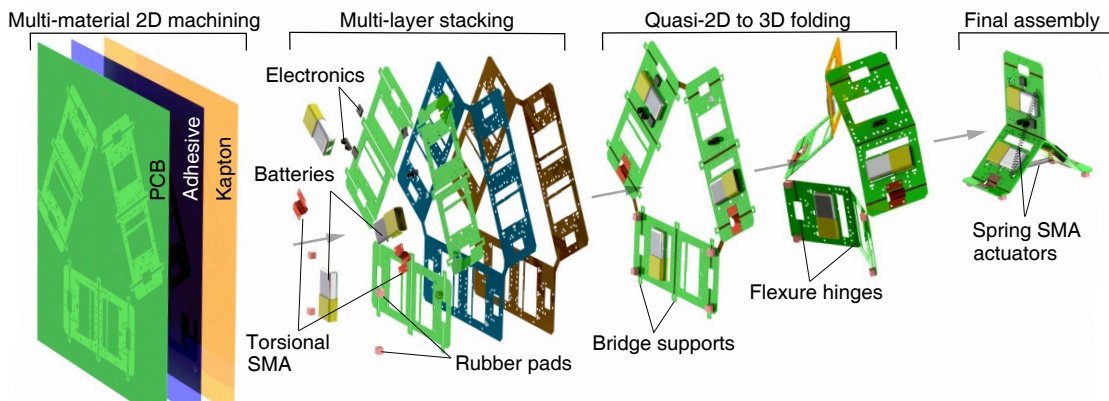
Tribot millirobot mechatronic, multi-layer 2-D rapid fabrication and folding assembly process. The PCB and Kapton layers serve as the structural support and compliant hinges, respectively and are stacked by an adhesive layer and heat press. Then, a stencil mask is placed on the PCB face and footprints are filled with solder paste. The stencil is removed, the electronic components then placed onto the footprints and the circuit placed on a heat plate for reflow. After, batteries, latch rubber pads and torsional SMA actuators are attached and the bridge supports are removed for fold ability of hinges. Finally, the multi-layer sandwich is folded along the hinges to obtain Tribot’s 3-D structure, spring actuators, wires are installed and the robot is programmed and tested.
